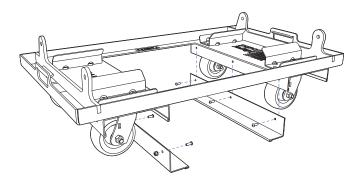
MCF-PANTHER Caster Frame, Forklift Guides Removed
